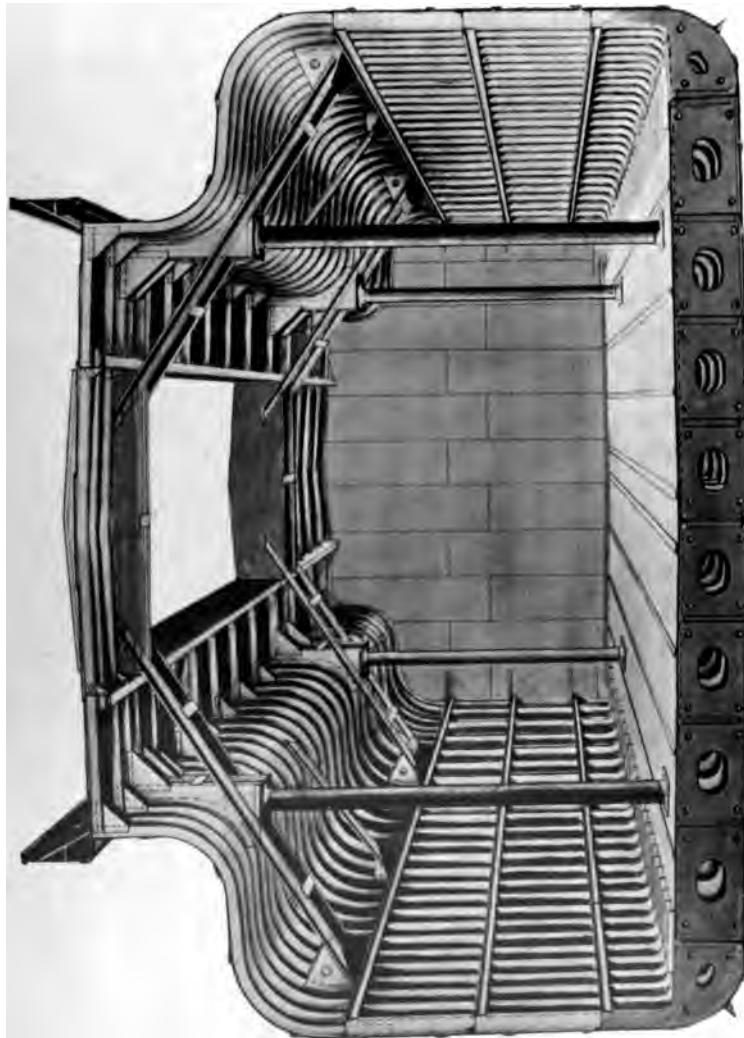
Hold View of Turret Steamer with widely-spaced Steel Tube Pillars, having no Hold Beams nor Harbour Deck Beams.
